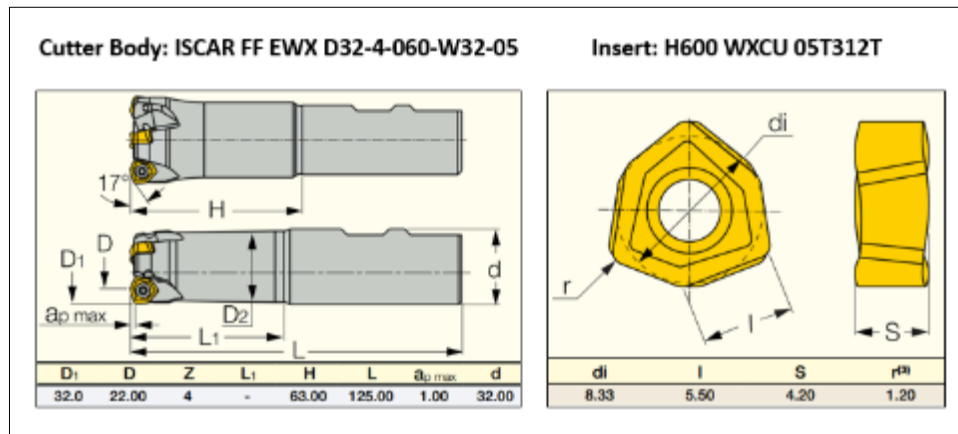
ISCAR EWX cutter and H600 hexagonal inserts
